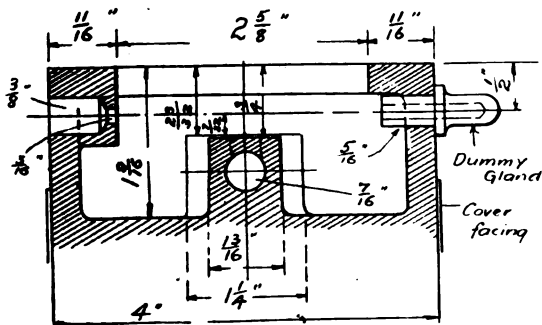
LONGITUDINAL SECTION THROUGH CENTRE LINE OF REGULATOR VALVE SPINDLE. (Half size.)
